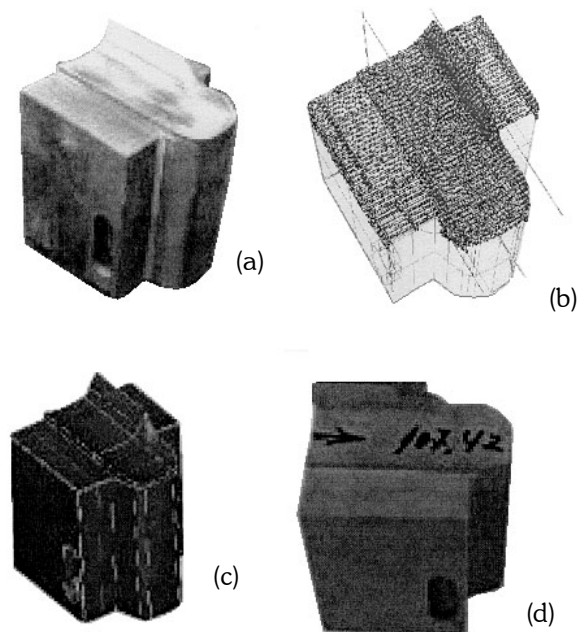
Sequence to reconstruct a cut and stamp press tool. a) Press tool with wear; b) 3D-digitising with laser triangulation for complex surfaces and reference points captured from contact probe in a CMM; c) 3D-CAD; d) prototype tool manufactured in resin.
